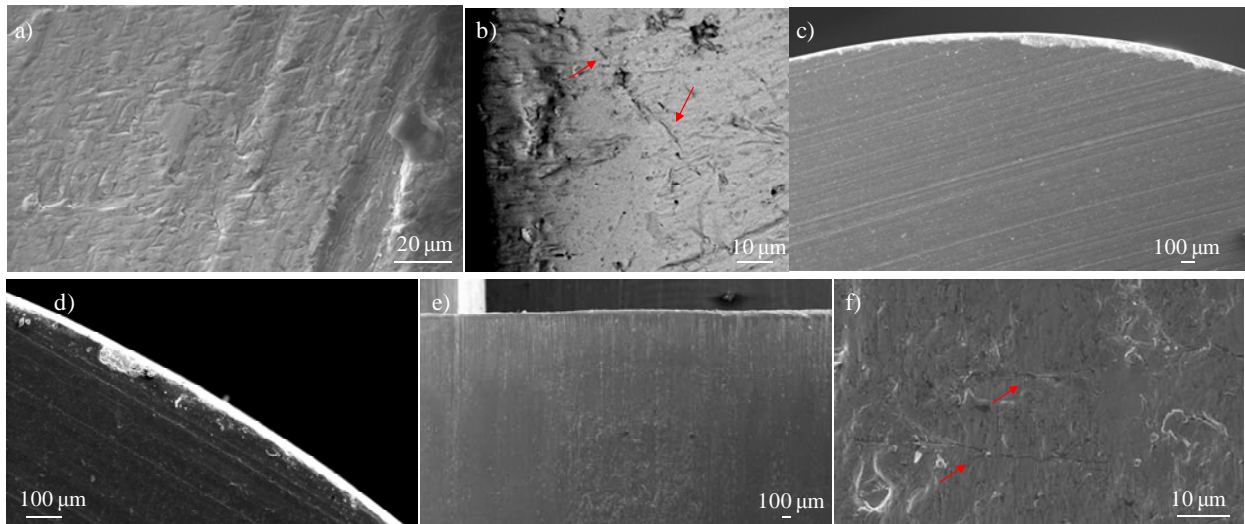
Fractography of an UNIVERSAL punch: a) wear after 3000 strokes; b) microcracks after 17000 strokes; c) small fractured area after 17000 strokes; d) chipping after 26000 strokes; e) wear at the flank face after 26000 strokes and f) cracks at the flank face parallel to the cutting edge
